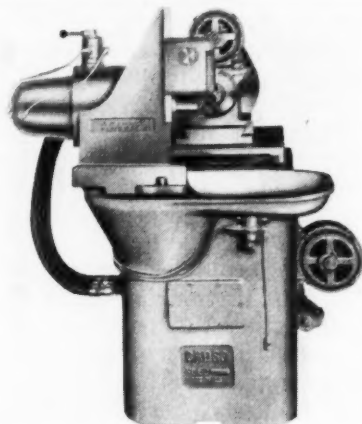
Gear-tooth Chamfering Machine Made in Single- and Two-spindle Models
